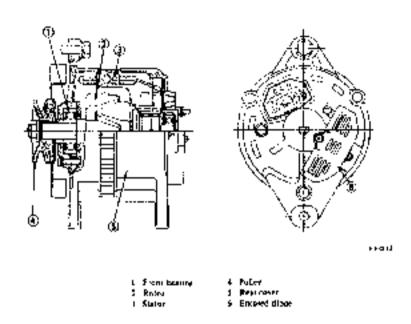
Sectional View of LT 150-05B (LT 135-135)
